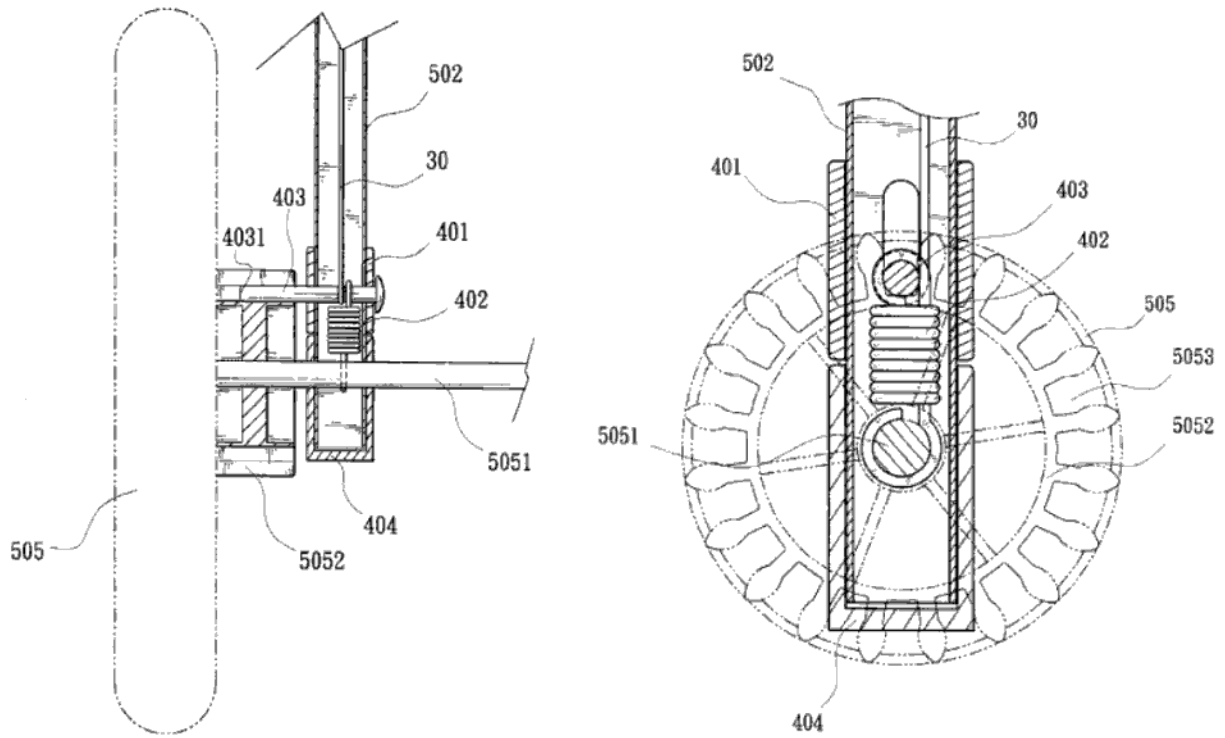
US Patent #6298949 - Stroller Brake Assembly (Yang & Cheng, 2001)
